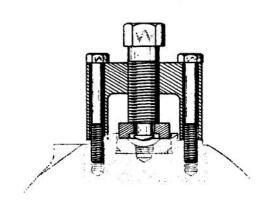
ADJUSTING THE UPPER BALL JOINT
